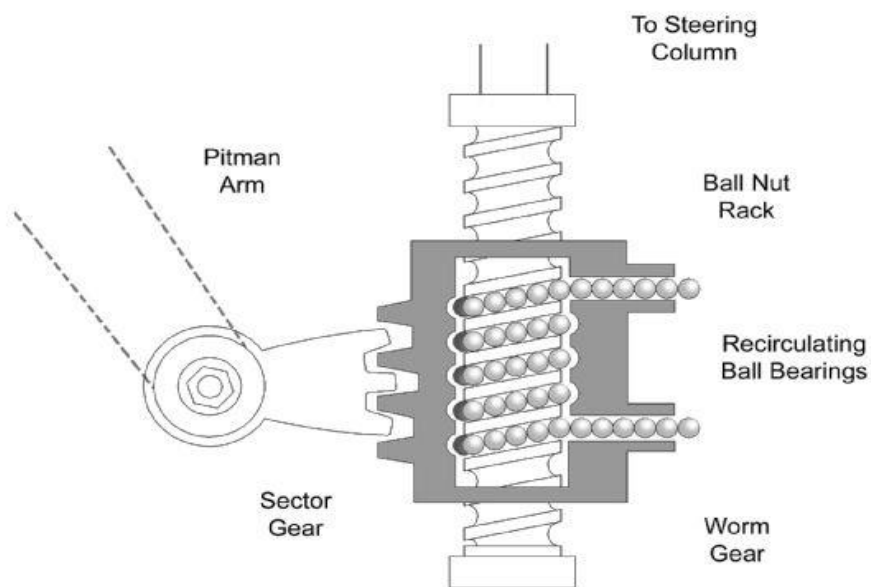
Recirculating ball nut and rocker lever steering type gearbox
